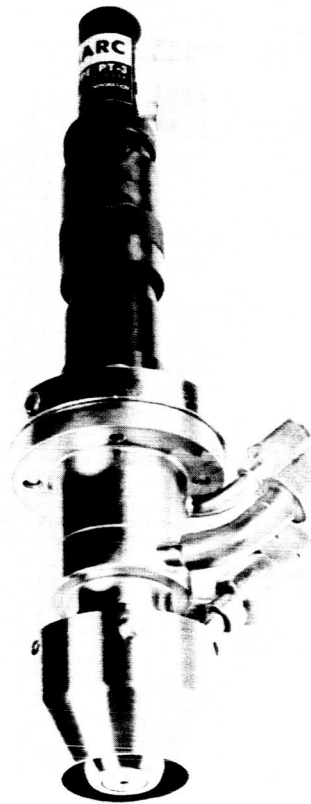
MECHANIZED PLASMA ARC-WELDING TORCH (REF. 54)
